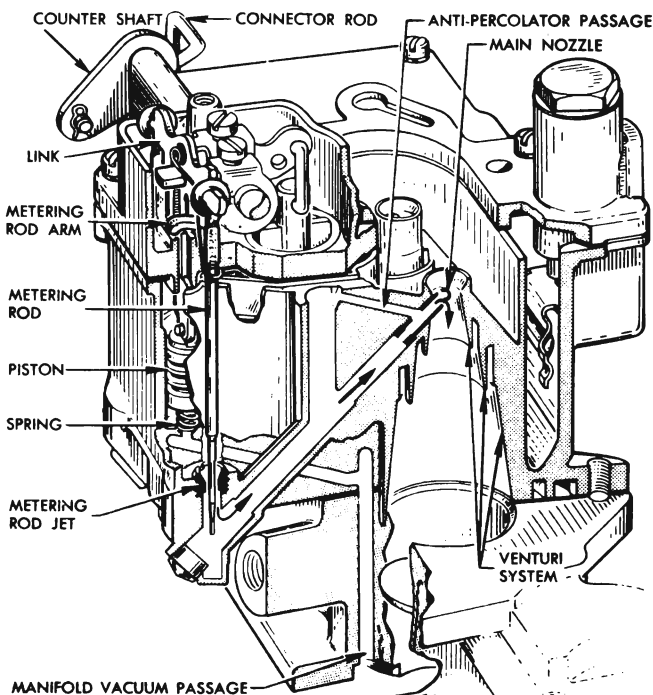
High Speed and Power Systems—Carter Carburetor
